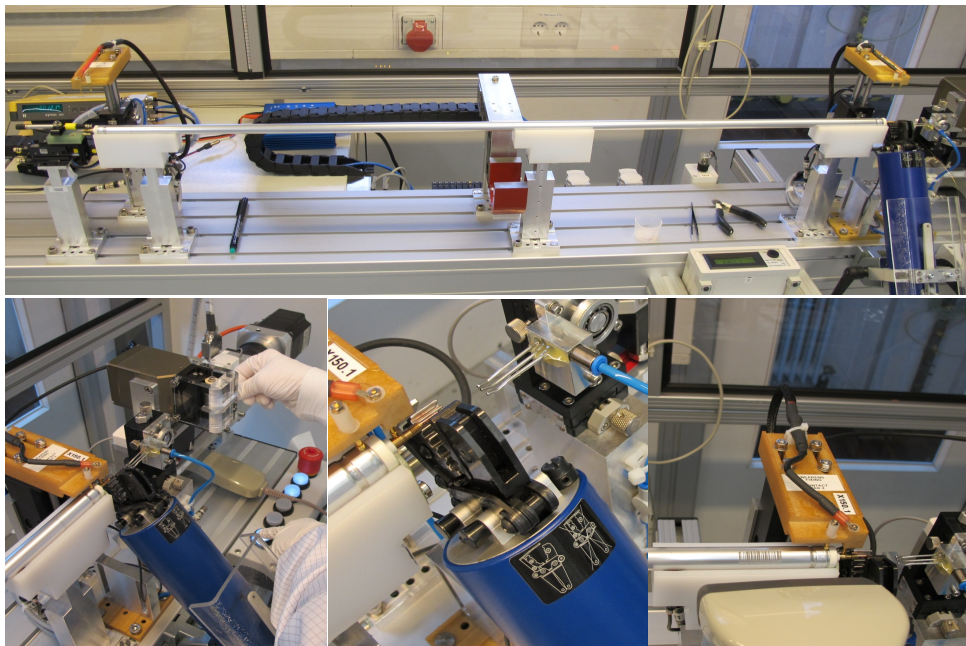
Wire tensioning machine (top), with a closeup of the tensioning device (bottom left), tube crimping (bottom center). The final step of entering the fundamental wire frequency and resistance into the database using the barcode associated with the tube (bottom right). The red component in the center of the top image is the magnet which, coupled with an alternating current, allows for a measurement of the wire tension without opening the tube.
